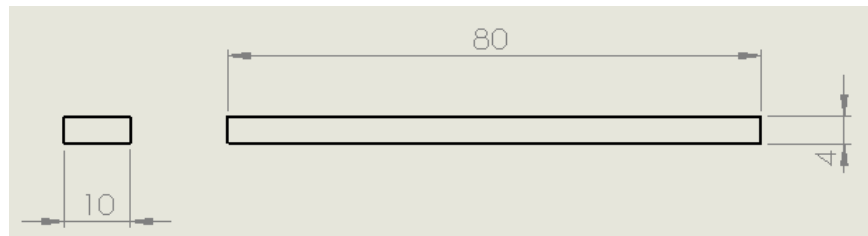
Dimensions of test specimens: 80 x 10 x 4 mm, [23]
